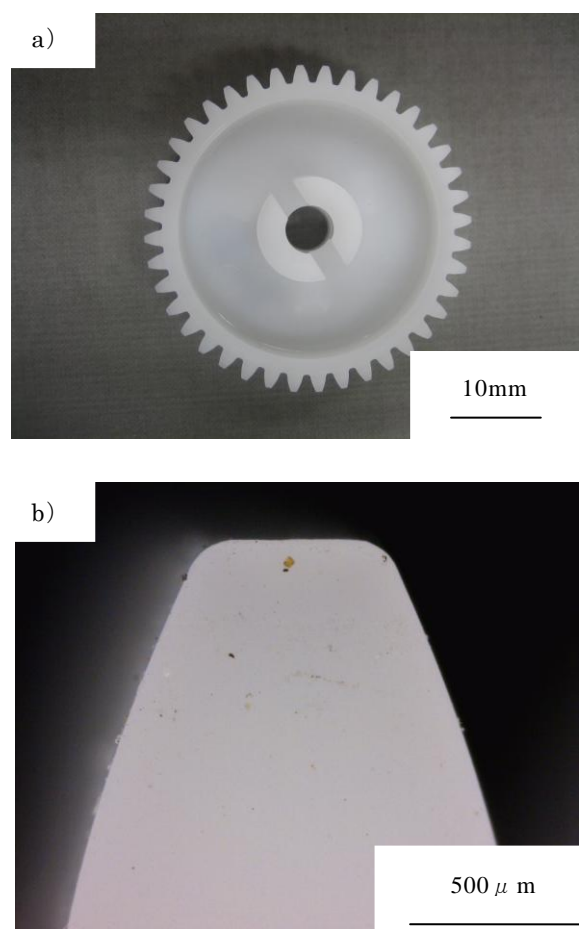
Photographs of plastic spur gear; a) outside, b) magnify
